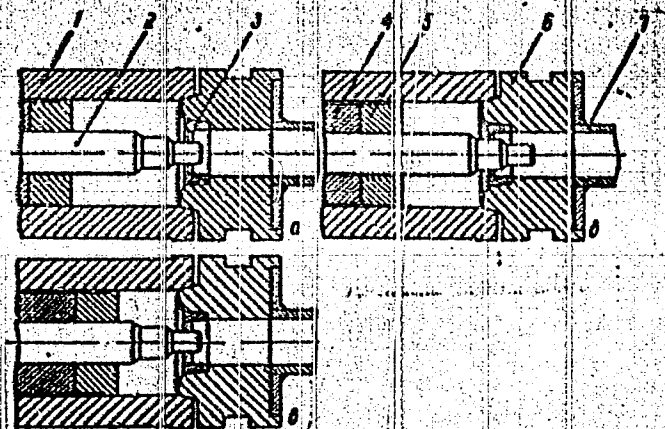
Device for pressing drill pipes with two internal thickenings.
